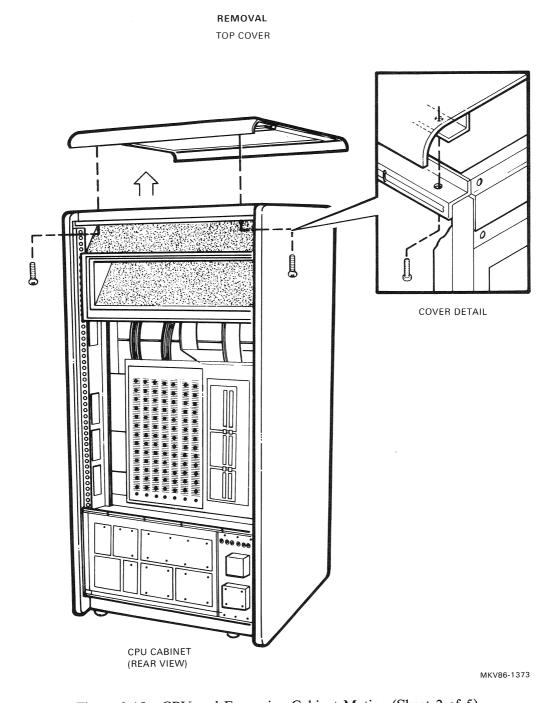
CPU and Expansion Cabinet Mating (Sheet 2 of 5)
